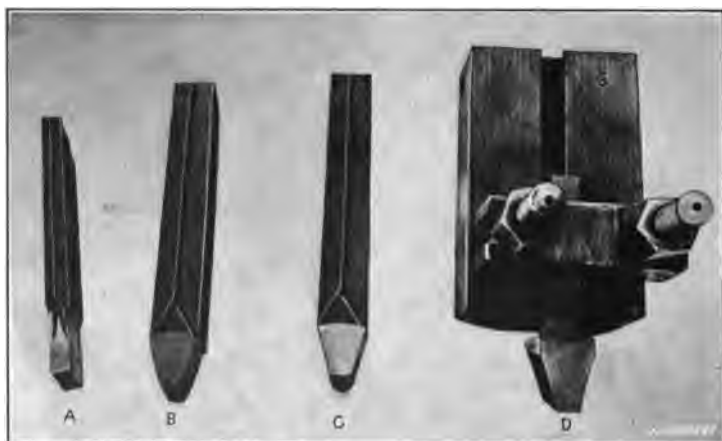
Successive Tools Used in Cutting Steel Rack Teeth
